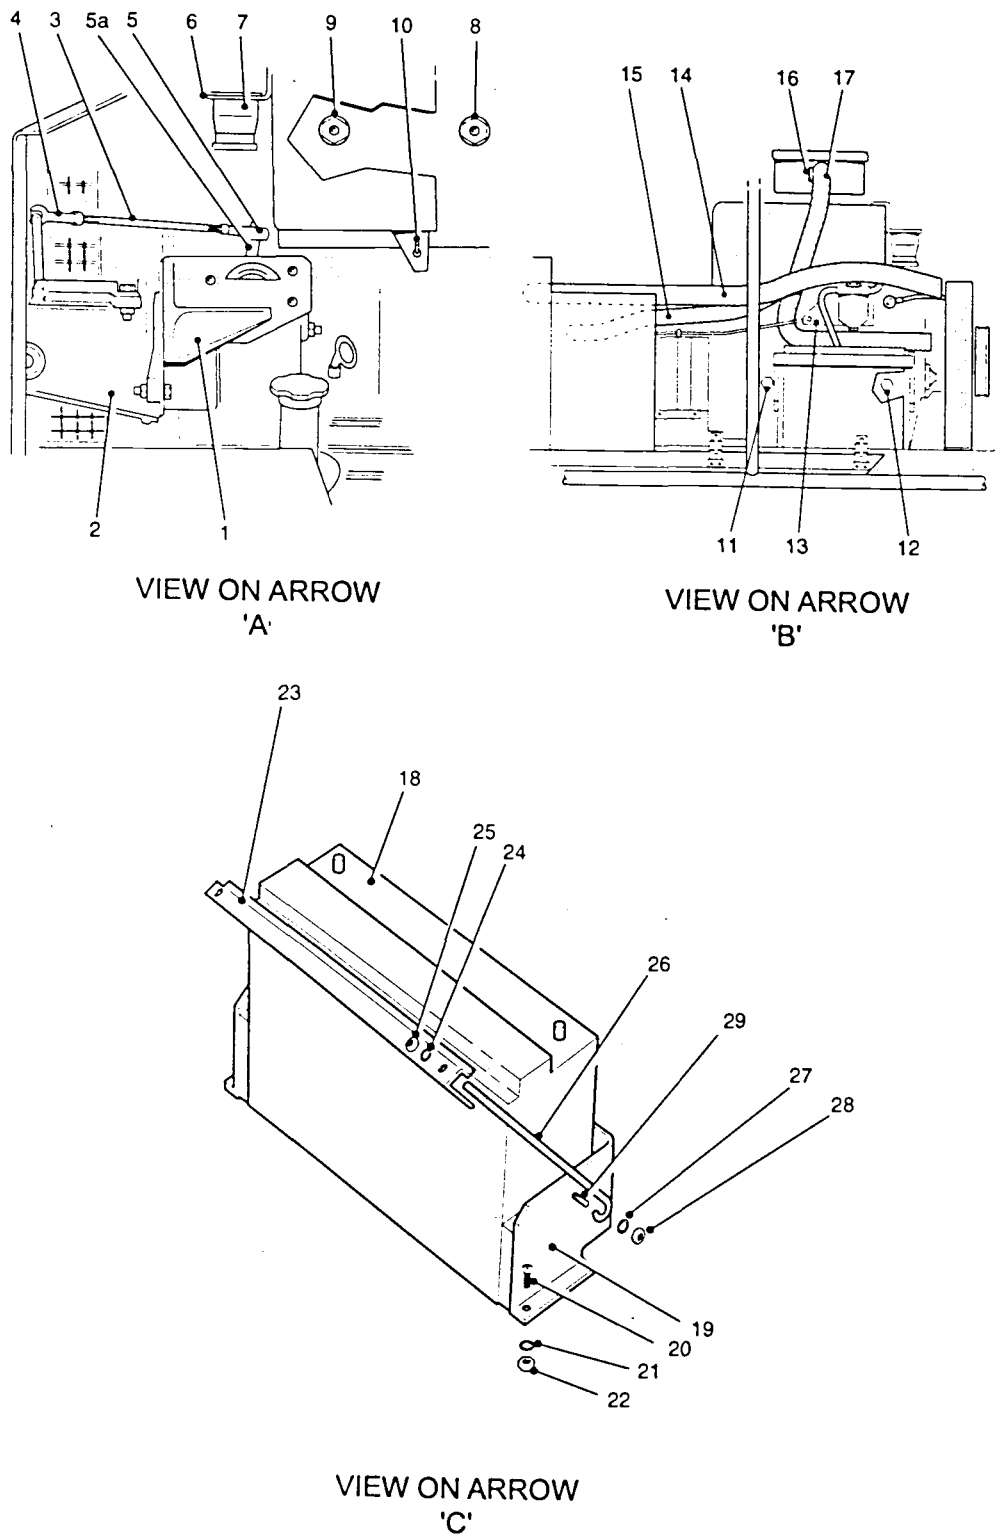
Engine/alternator assembly - views A, B, and C on Fig. 1
